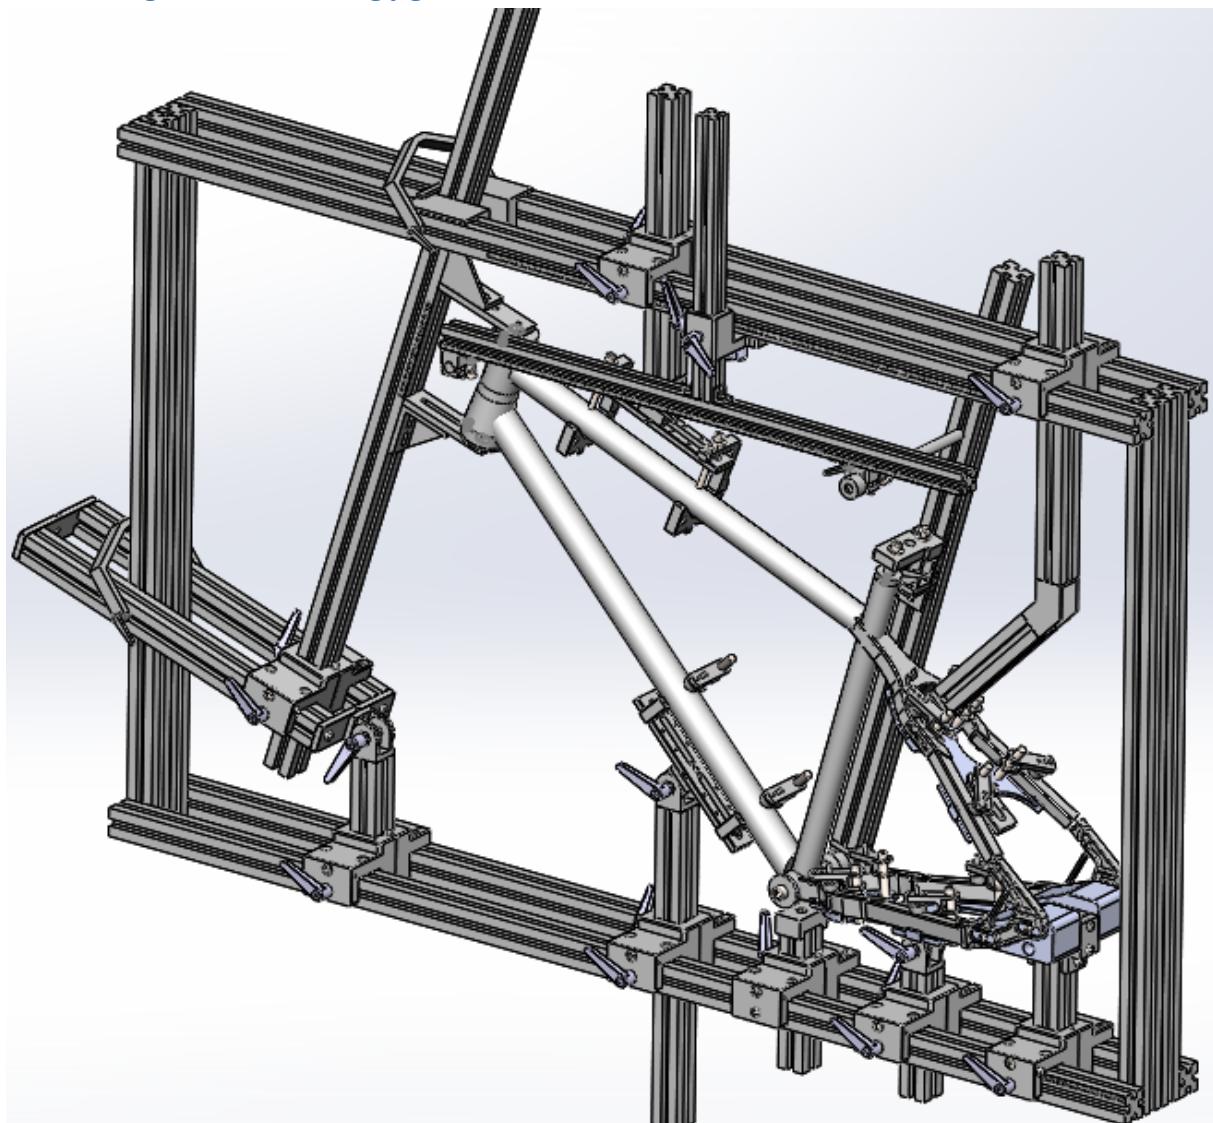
SolidWorks CAD model of the new welding-jig
